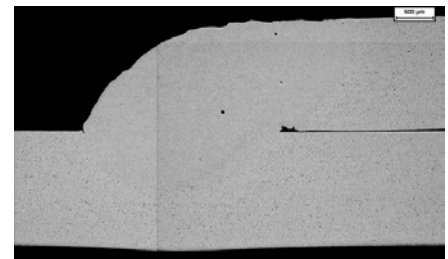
Achieved weld seam quality with mono beam laser
